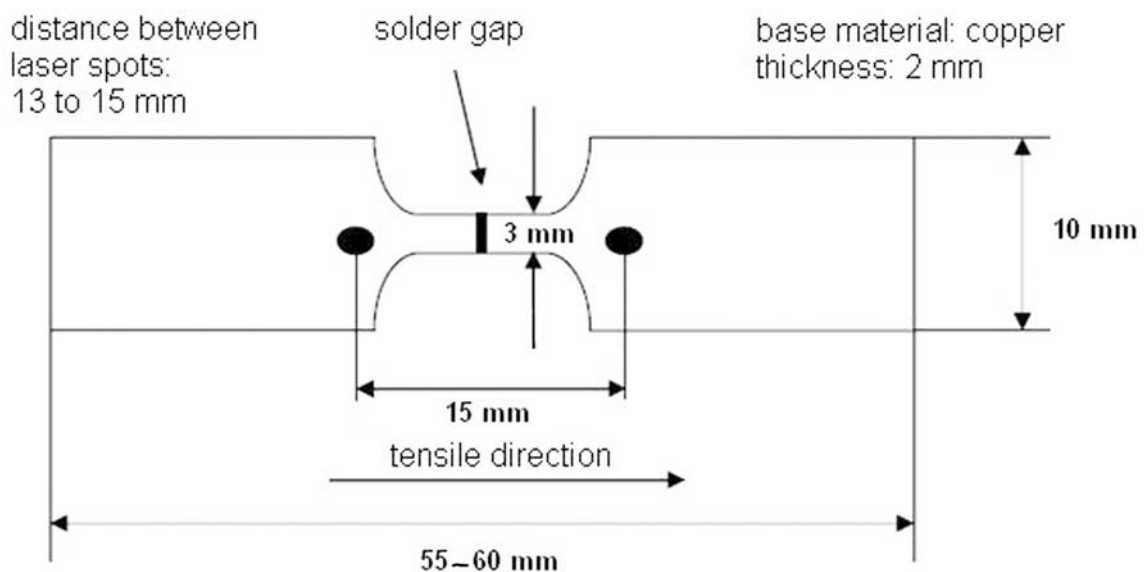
Schematic picture of the specimen geometry used for tensile tests
